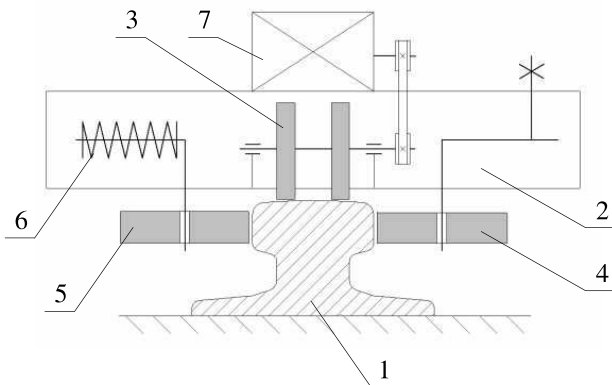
Mobile platform diagram: 1 – rail, 2 – platform body, 3 – drive wheels, 4 – positioning wheels, 5 – pressure wheels, 6 – spring element, and 7 – drive
